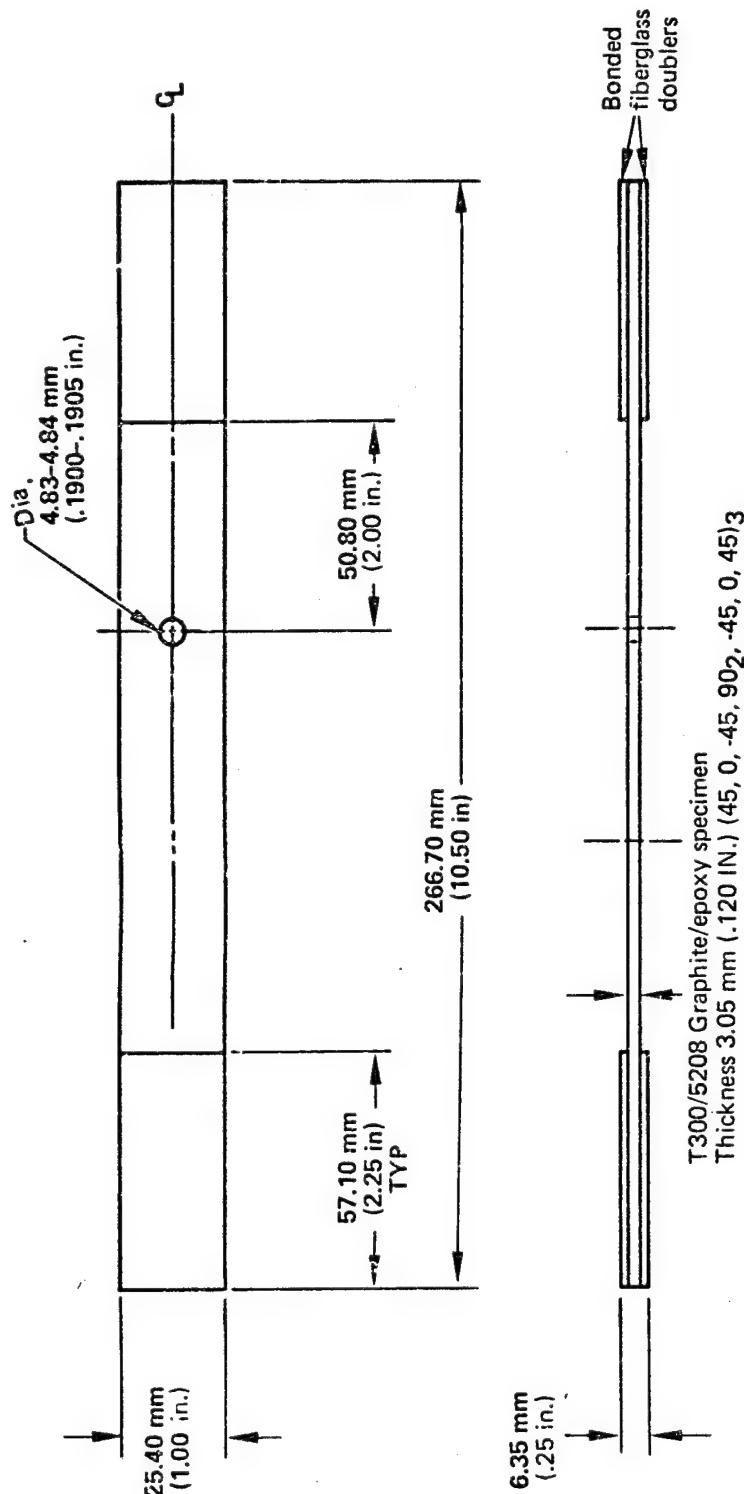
Static and fatigue pin bearing test specimen configuration.
